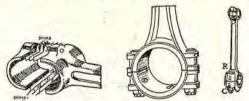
Connecting-rod lower bearing end with cap removed to show shims placed between the upper bearing and cap. By removing a shim the cap is drawn closer to the upper bearing, and hence it would be tighter on the crank pin. The shims shown above are the loose-leaf type. The laminated type of shims is often used.
